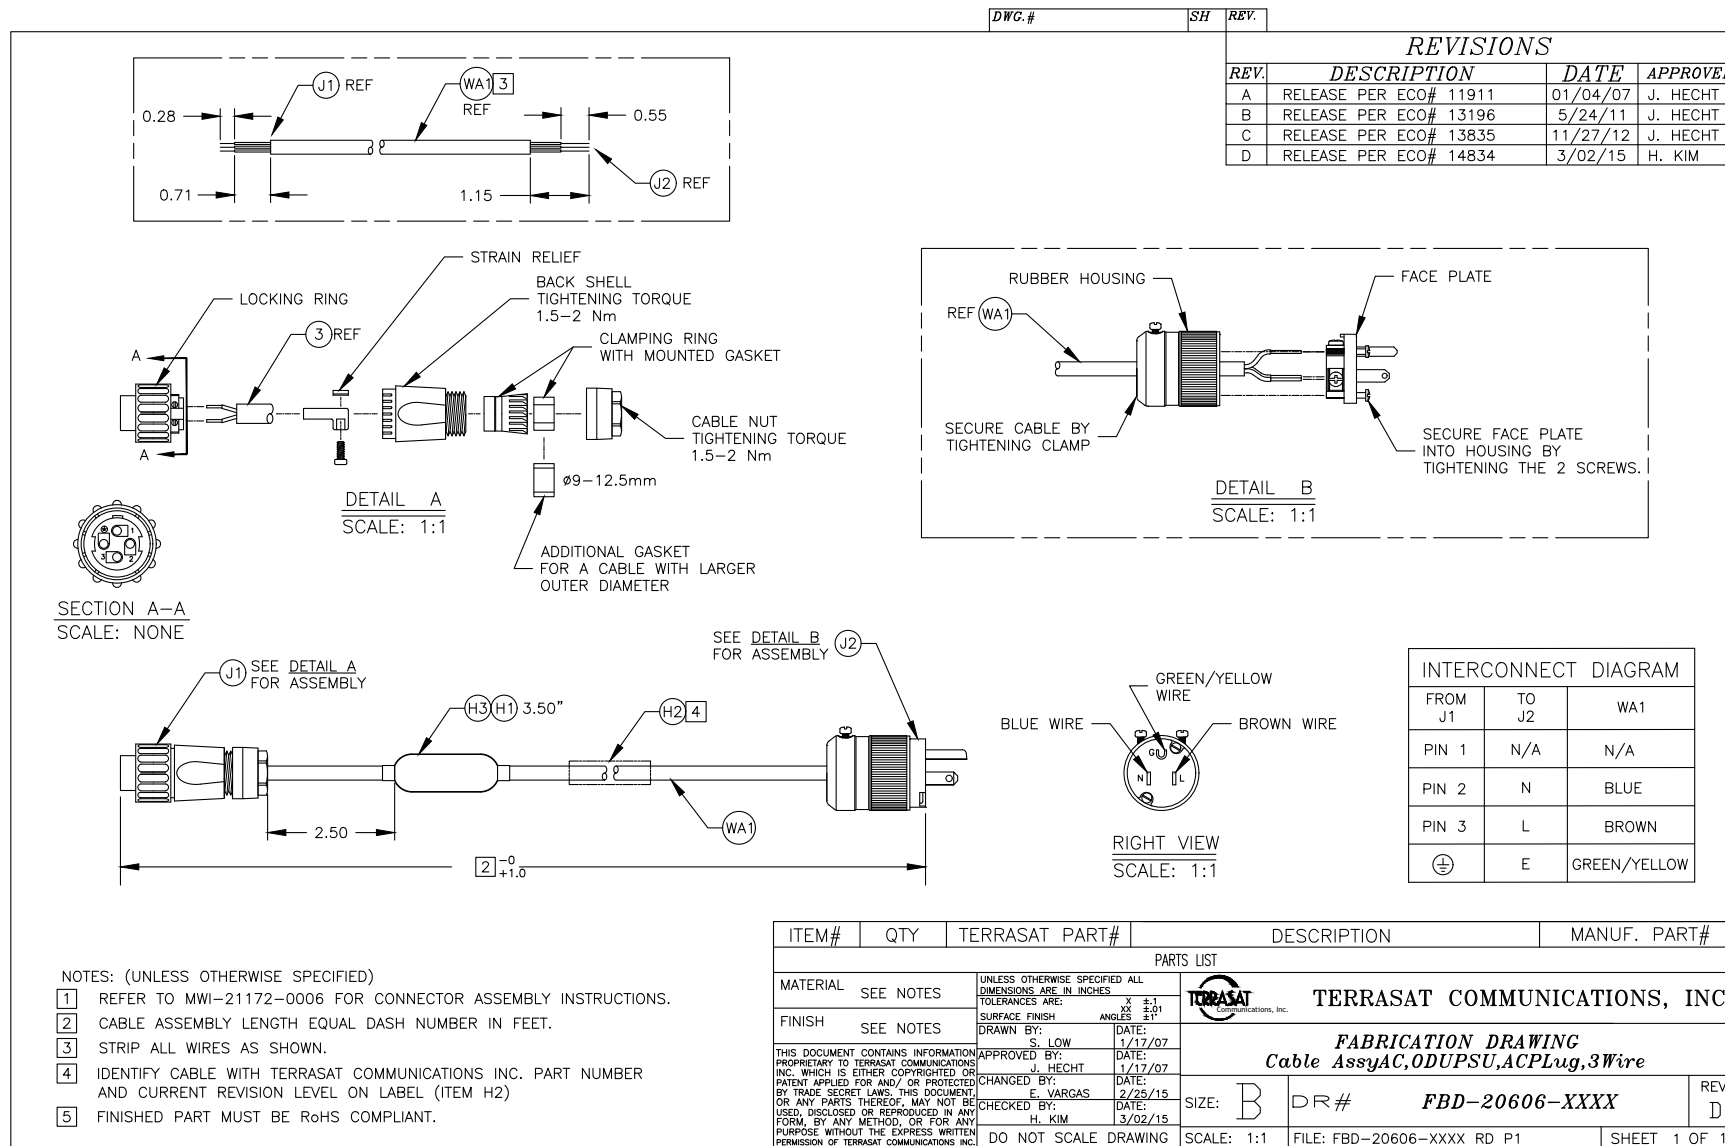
Fabrication Drawing, FBD-20606-XXXX, Rev D
